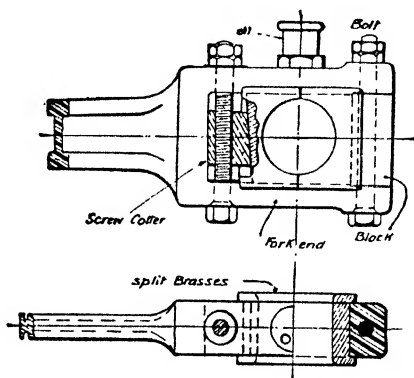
Box Big End with Screw-wedge Adjustment.
